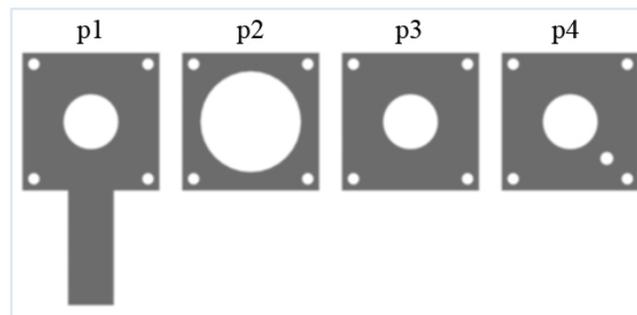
Aluminum and metal cut outs for bearing and rod support.
